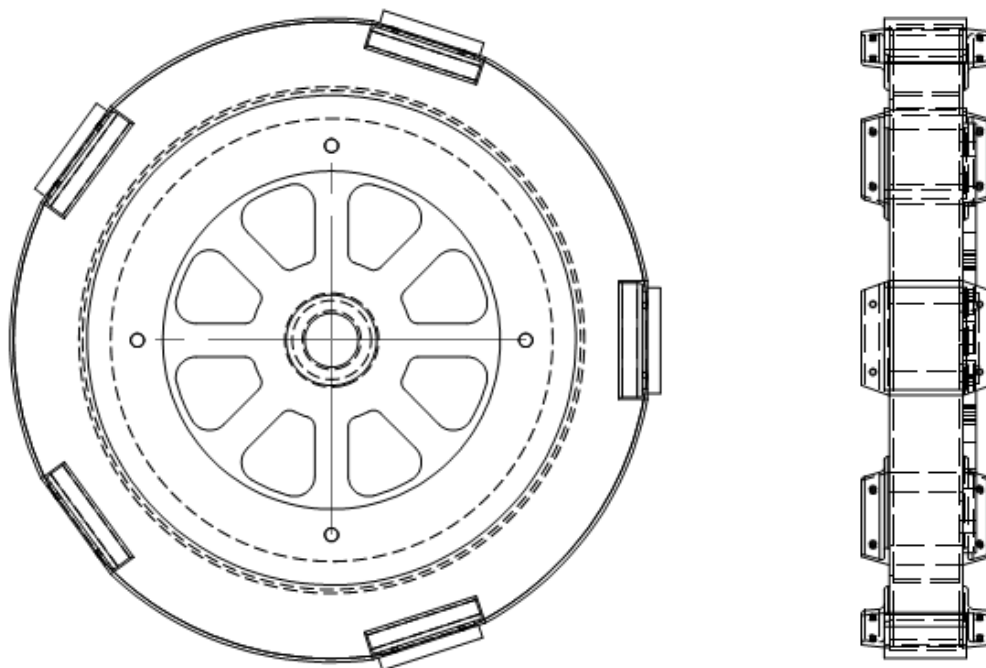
Front and RHS view of a Toroid Wheel Assembly
